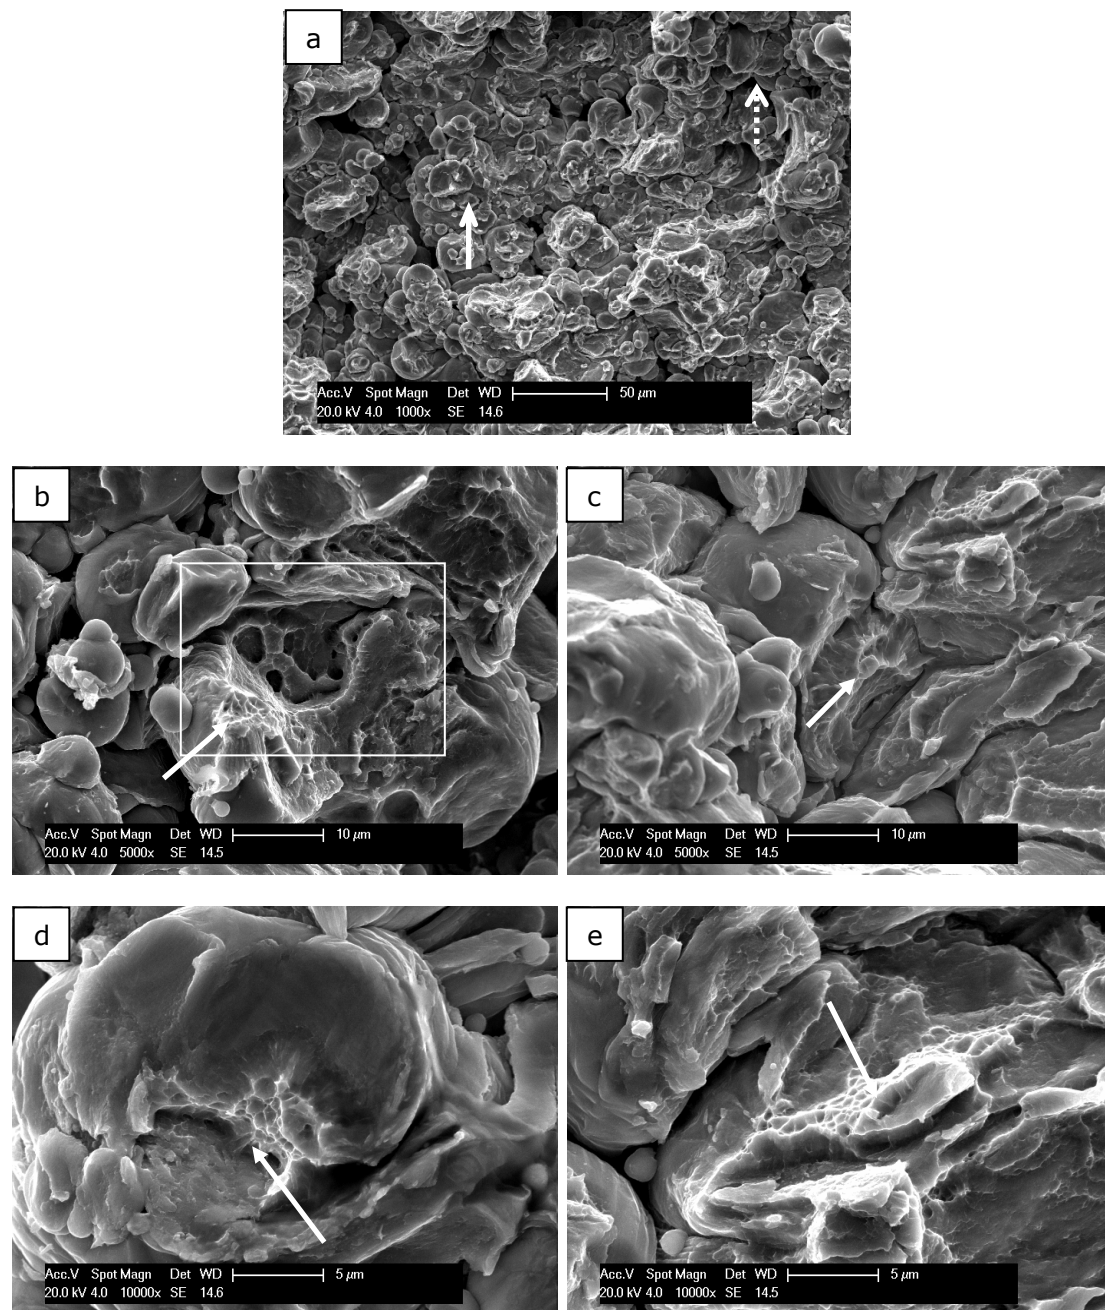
Fracture surfaces, after tubular coating tensile tests, of titanium deposits sprayed at 800°C. Direction of spraying from the top to bottom and load direction perpendicular to the paper surface
